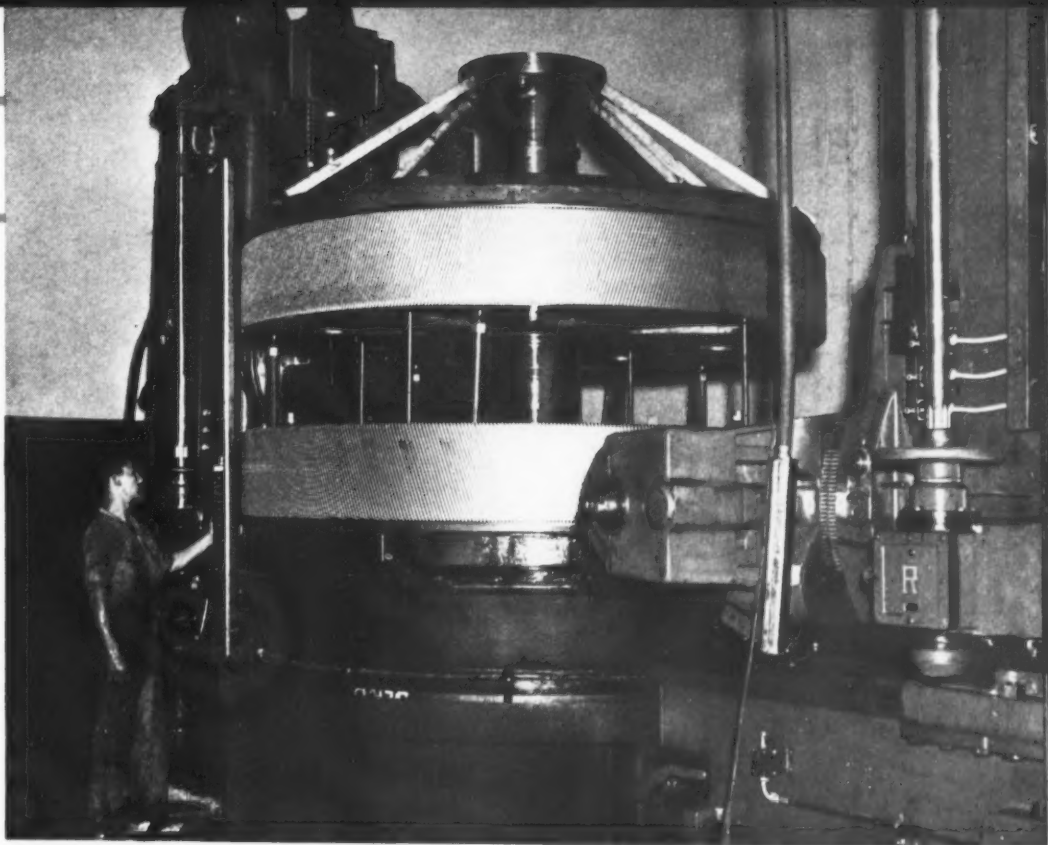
Turning 75 1/2-inch Diameter Fabricated Gear Blank on 200-inch Lathe. About 86 Hours is Required to Finish-turn Face, Groove, Chamfer, and Turn the Radius. Gears up to 146 Inches in Diameter are Used in Marine Turbine Units
